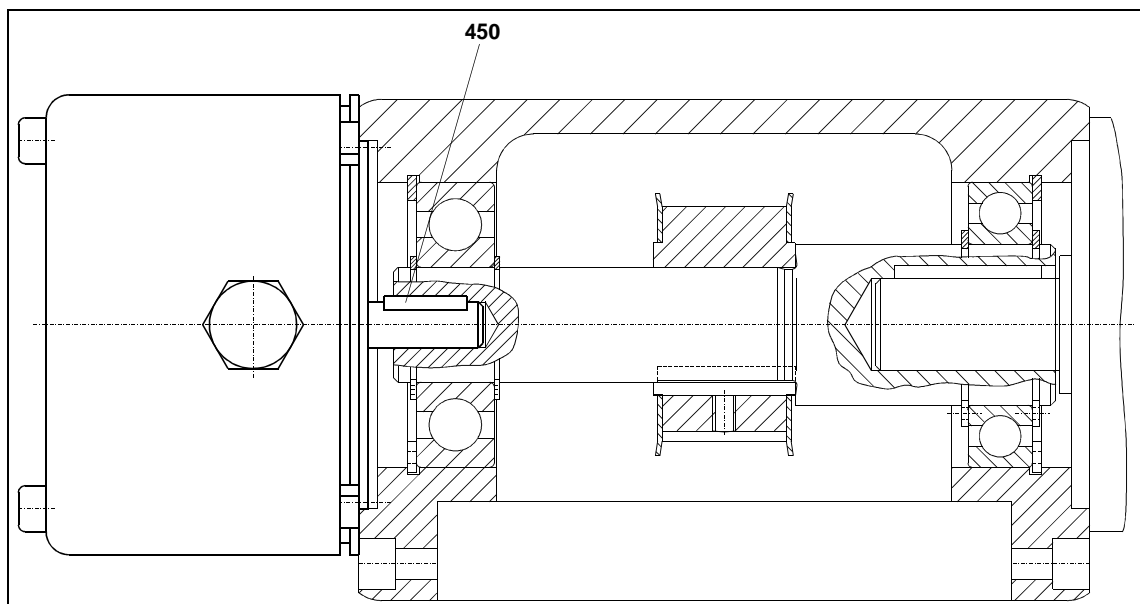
HTR50: Transmission drive belt tensioner
